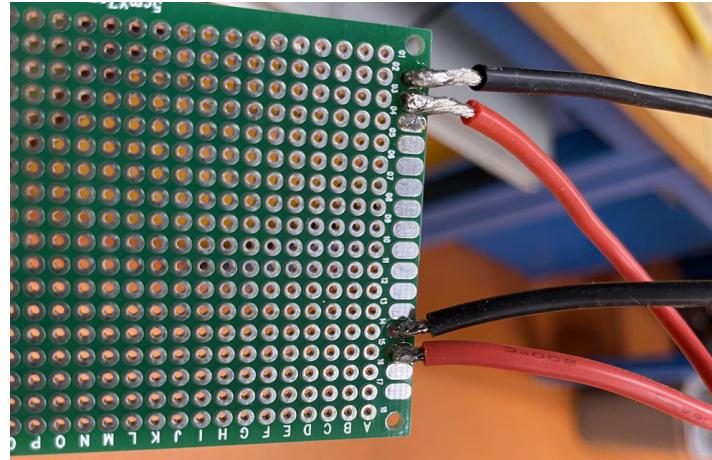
Four successfully soldered wires on the solderable breadboard
